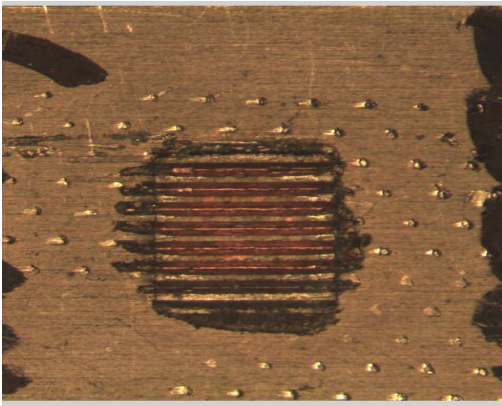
Photograph of part marking with 0.1-mm Cu buffer sheets
